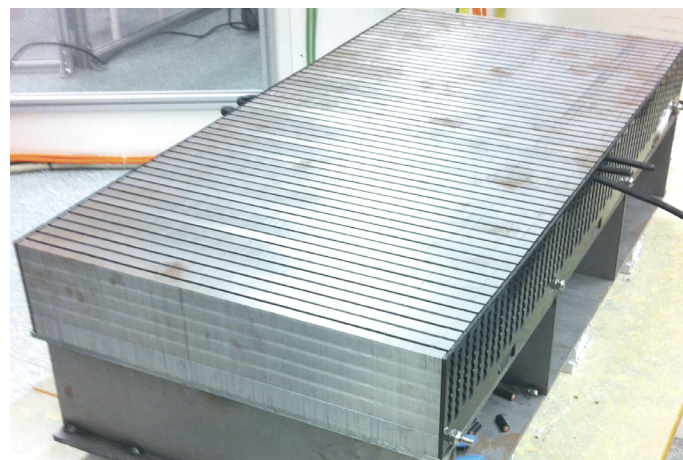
The UU WEC stator section part used during the robotized winding experiments.
